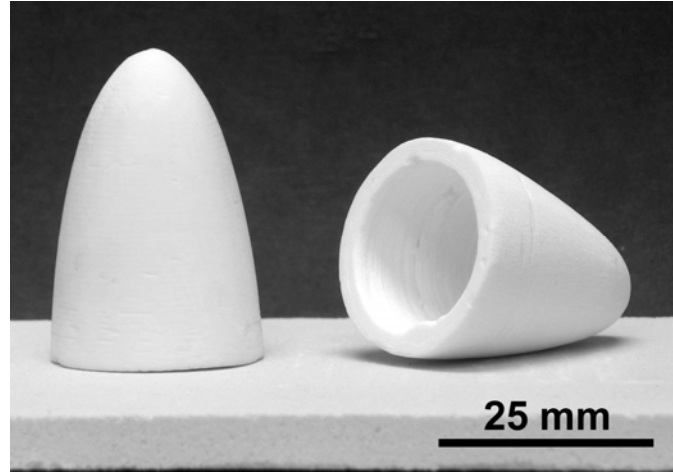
Optical images showing the side and bottom views of sintered Al_2O_3 ogive hollow cones fabricated by FEF using 580 μm diameter nozzles.
